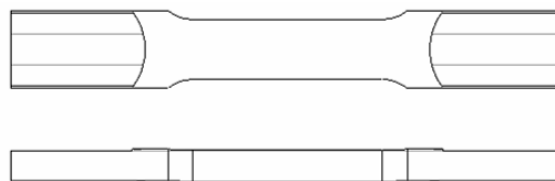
Specimen geometry for transverse tensile testing of welds on X100 pipes
